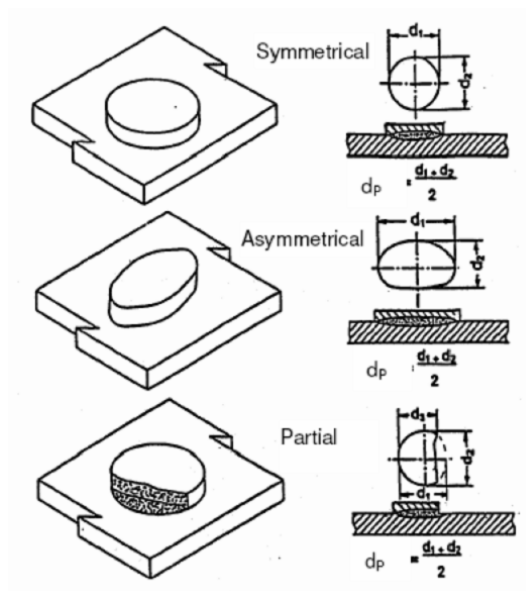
Spot diameter  $d_p$ ; weld with shear fracture
